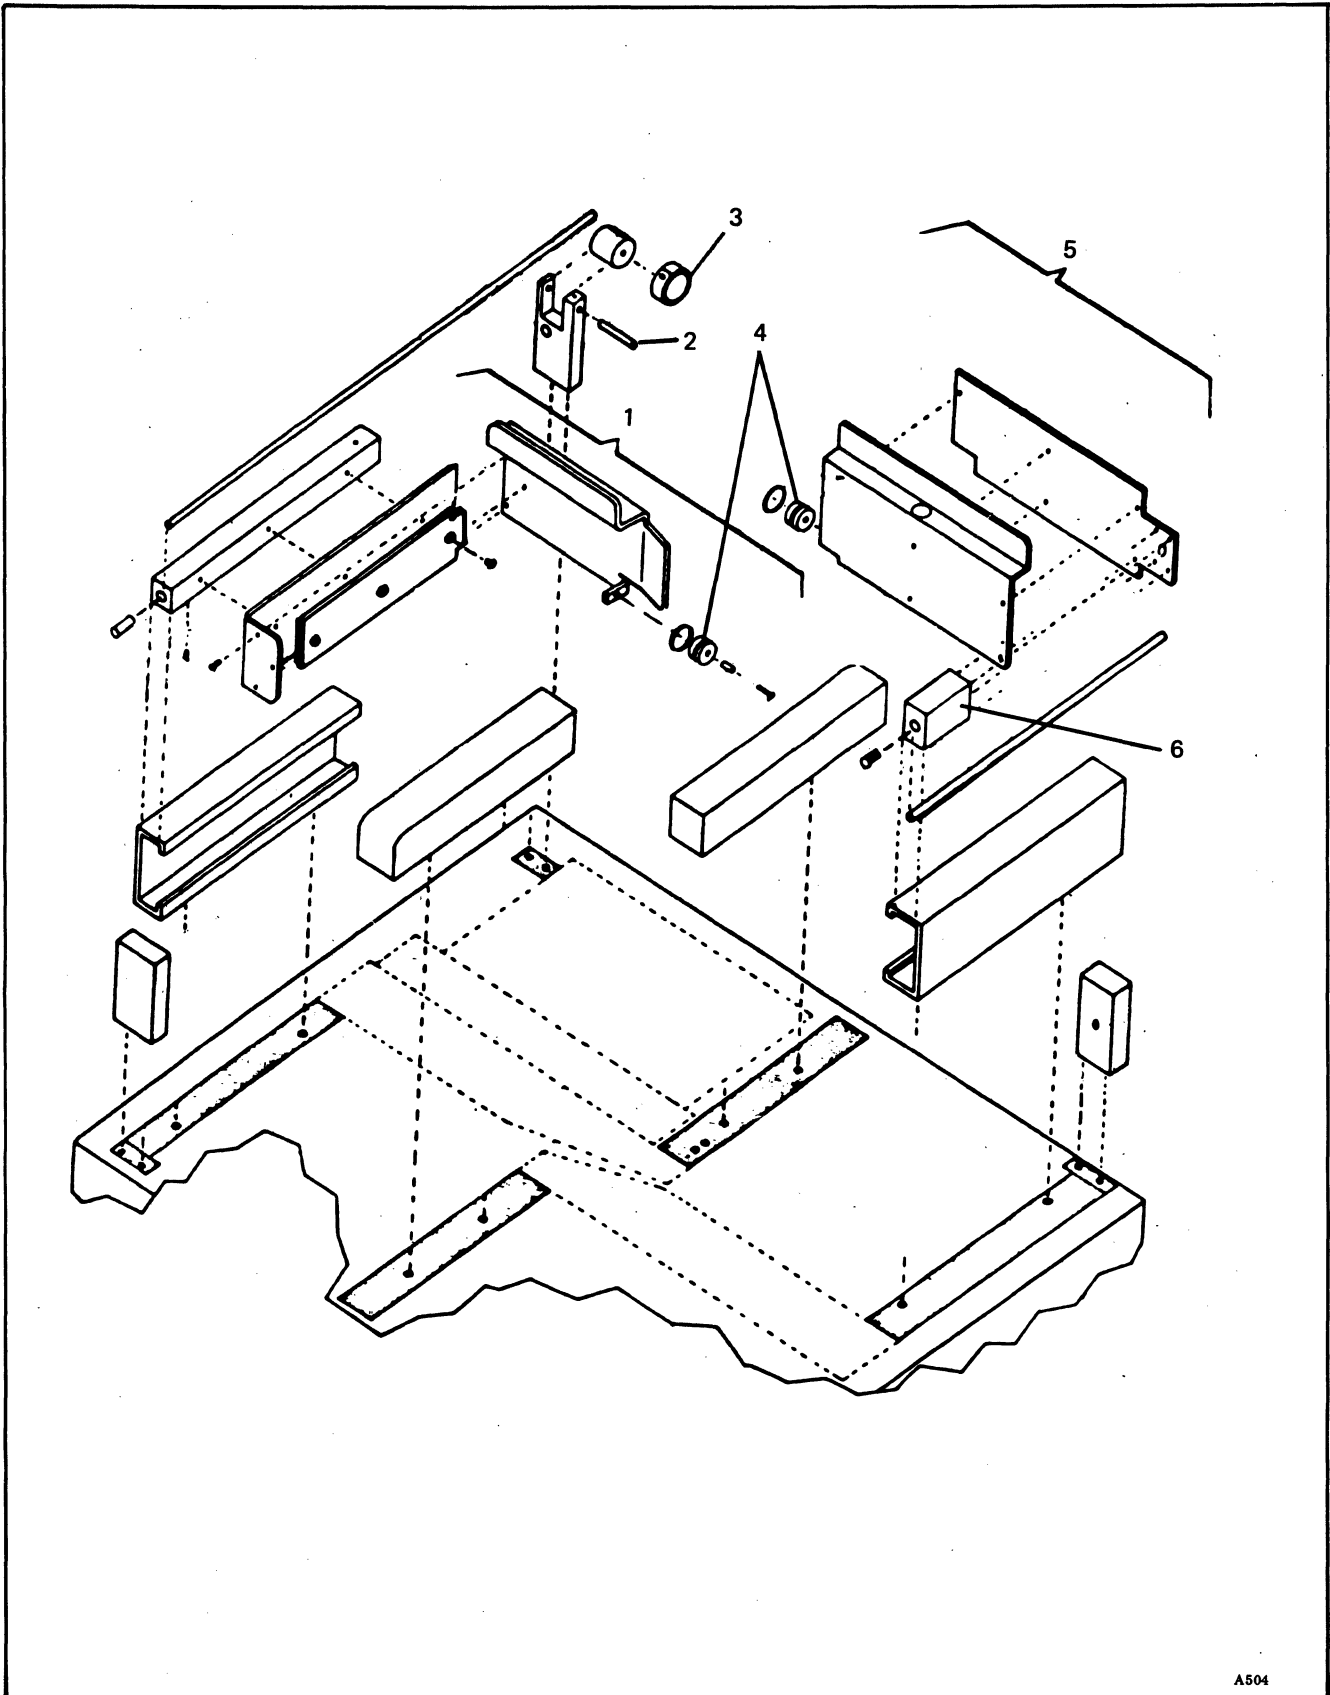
Main Frame Assembly (Sheet 1 of 2) (Top View)
